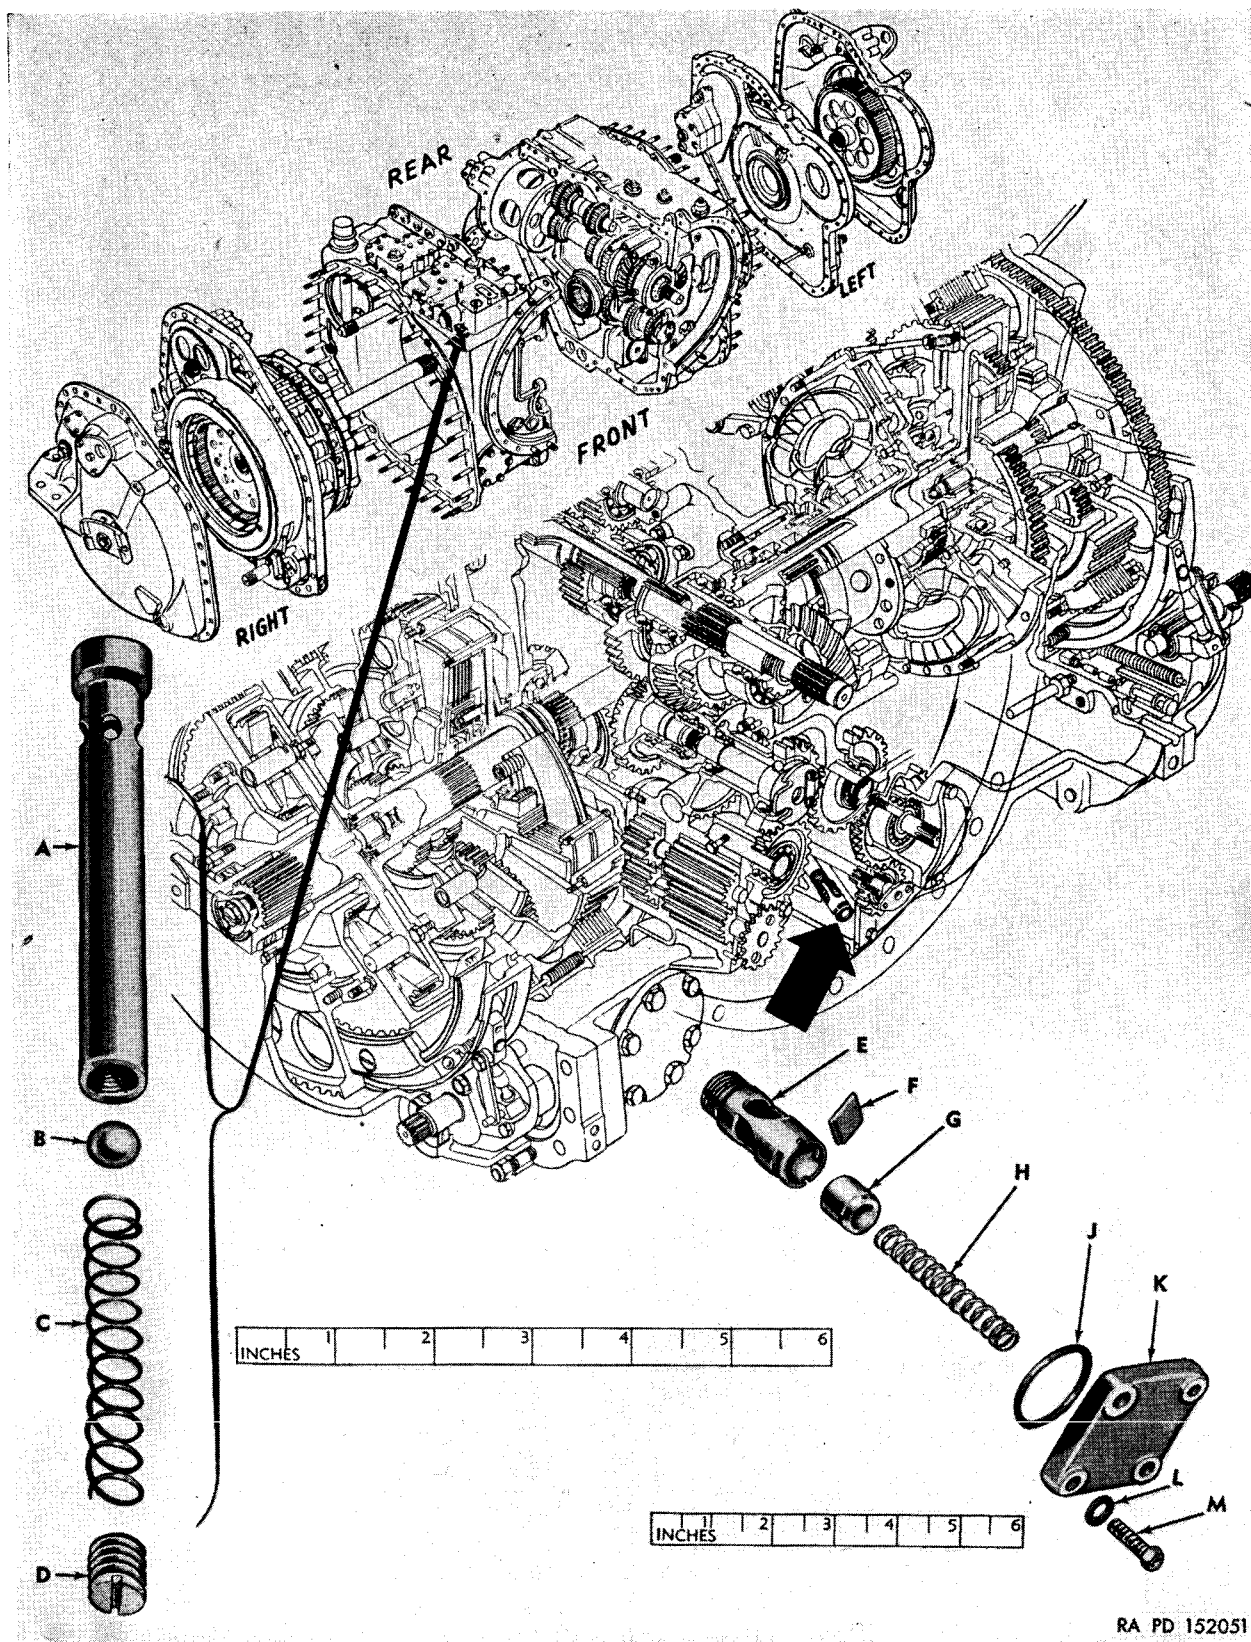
Converter-circulating-pump by-pass valve and main pressure-relief-valve body assemblies—exploded view.
